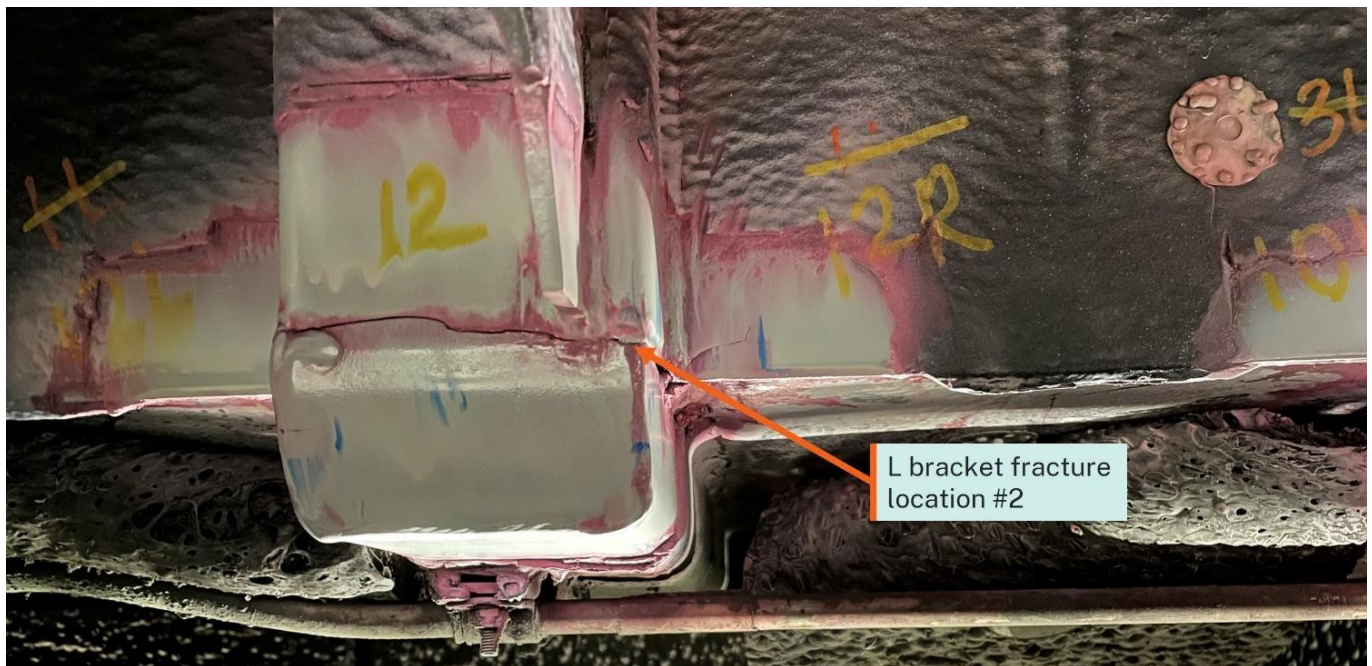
Left-side bogie box RBS fracture location #1 and L brackets fracture location #2
